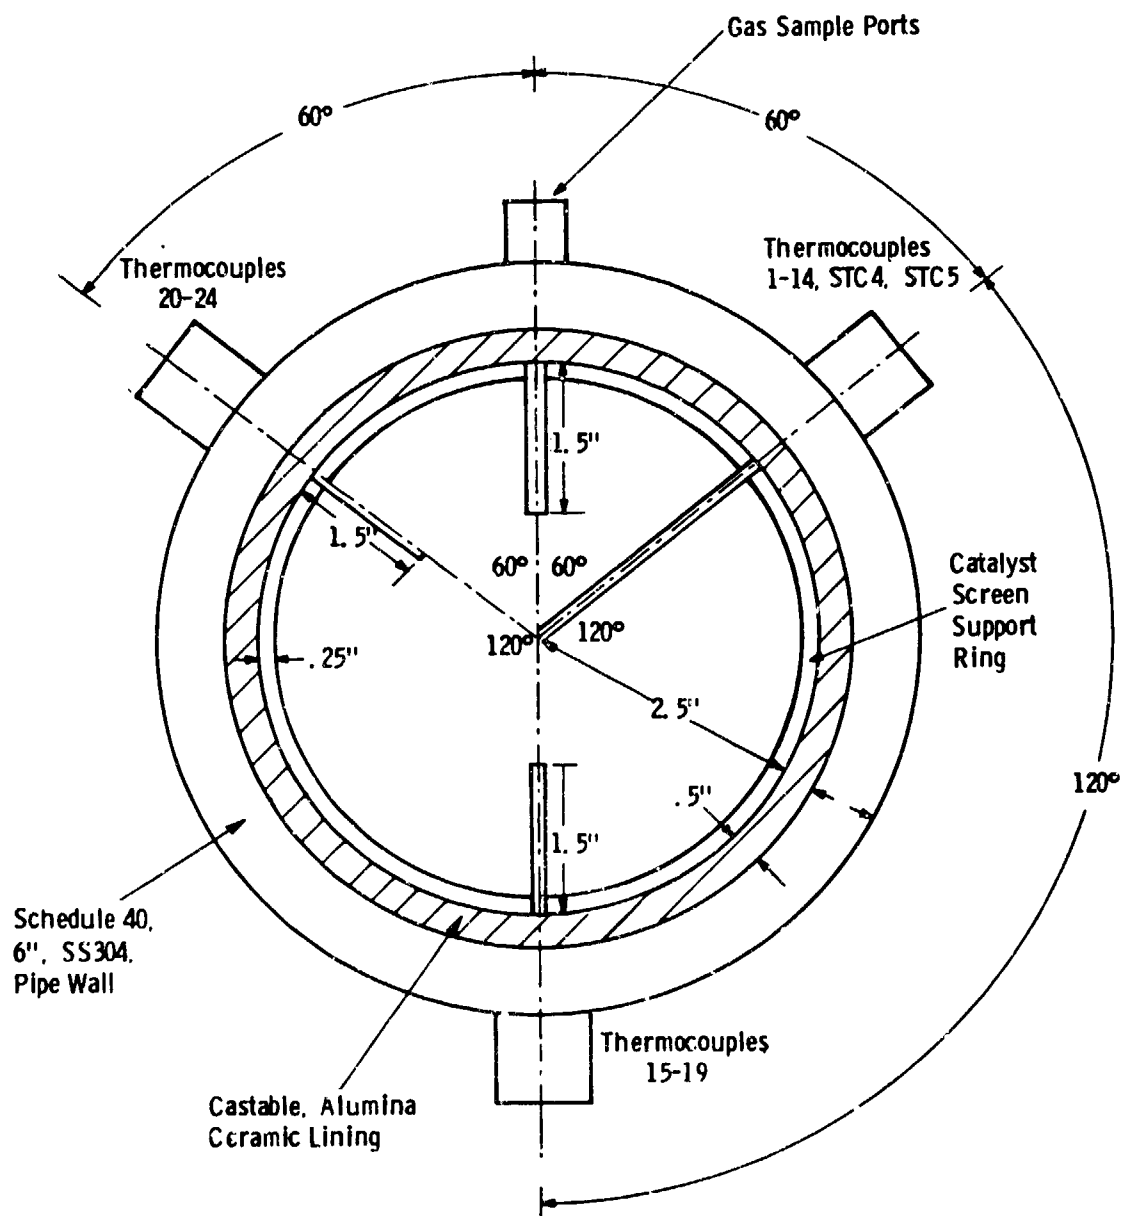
Reformer Thermocouple and Gas Sample Port Locations
